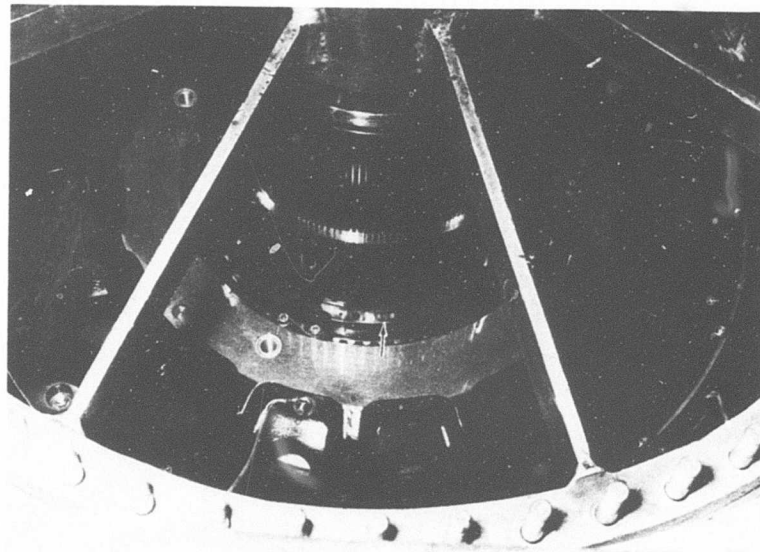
Main Bevel Gear Timken Bearing Inner Race Temperature Indicators.
